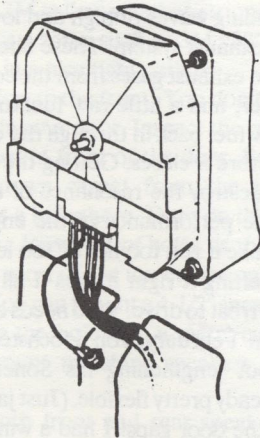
Drill the body and attach the black wire to the body with a sheet metal screw.
